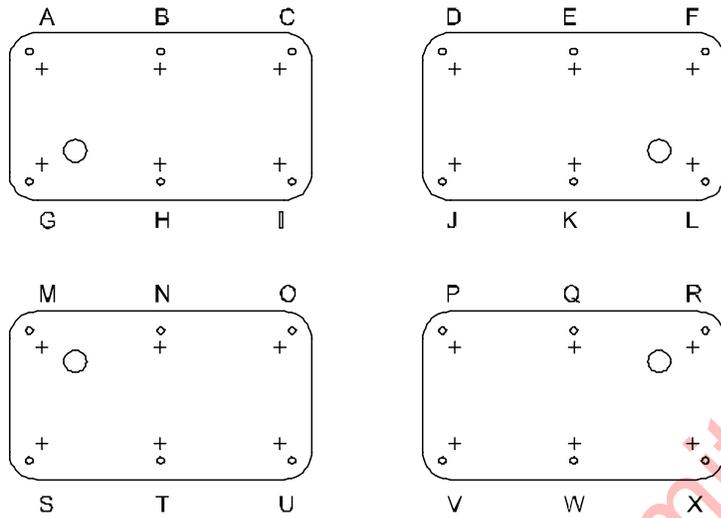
Typical Soleplate Layout for Elevation and Level Measurement
